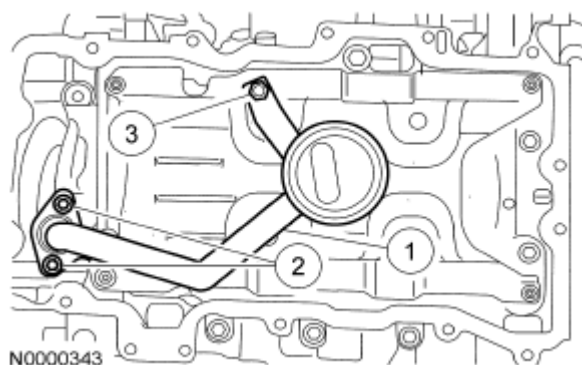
Installing Oil Pump Screen & Pickup Tube
